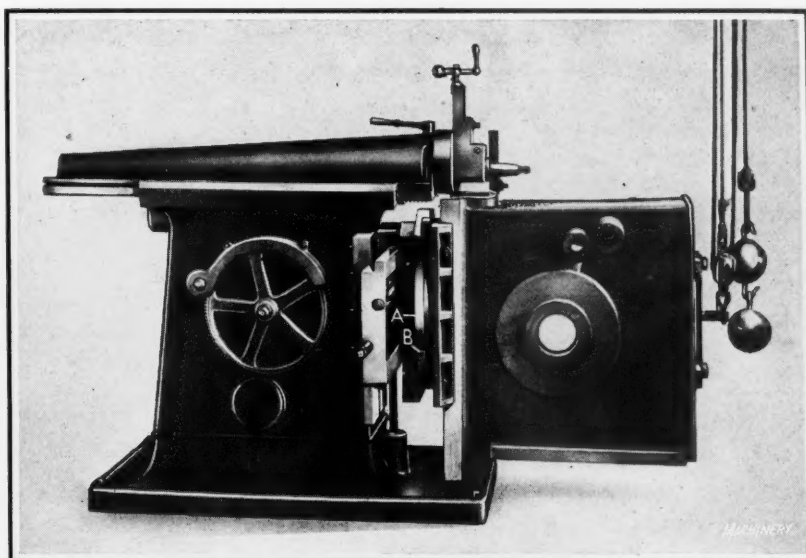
Fixture used in holding Column Casting of a Shaper for planing Four Sides of the Work at a Single Setting
